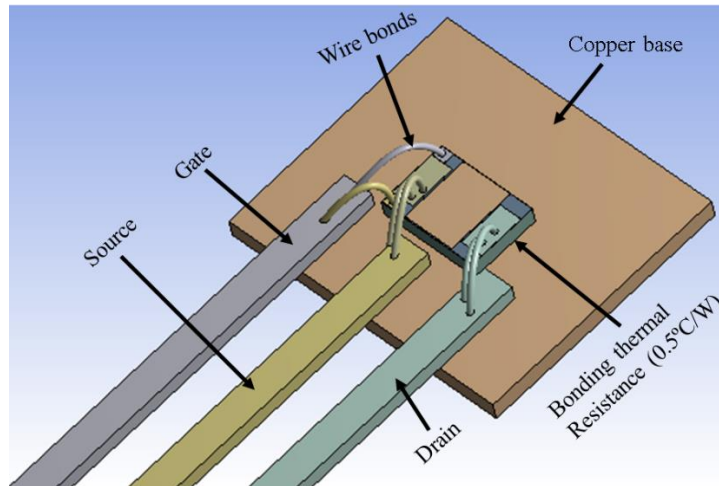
3D schematic view of GaN face up on TO-220 package without the epoxy resin
